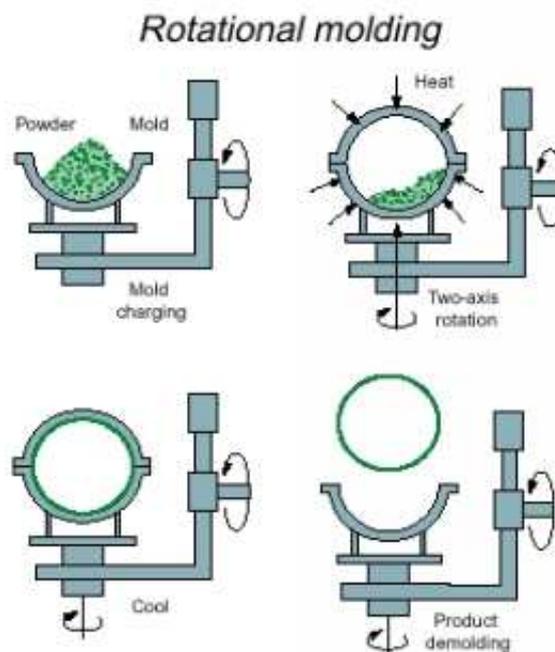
Schematic illustration of the four steps of rotational moulding.
